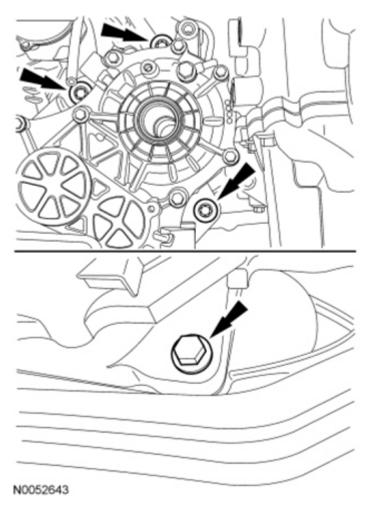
Locating Transfer Case-To-Transaxle Bolts Courtesy of FORD MOTOR CO.
